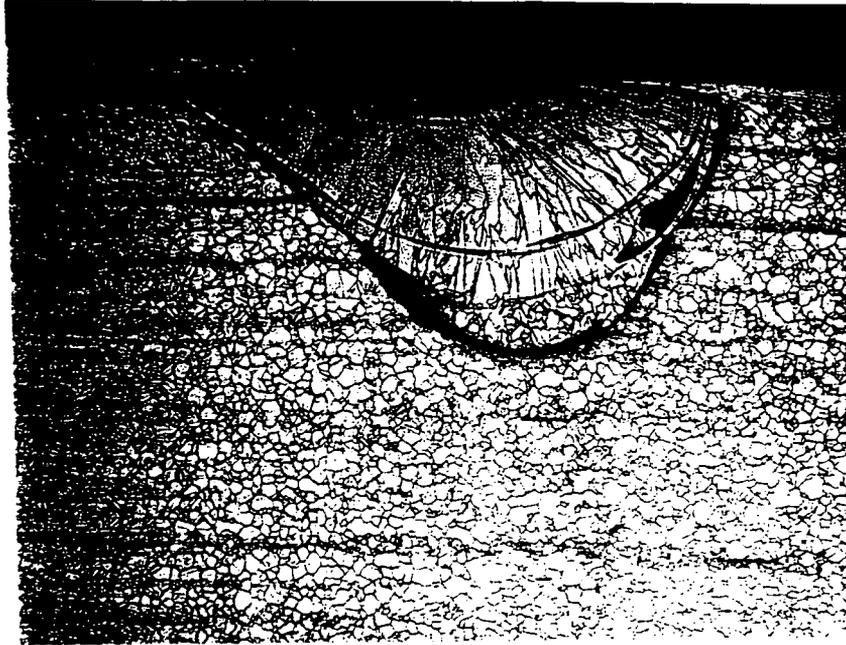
Cross section of weld KR 15 in the tube showing the deformation of the weld columnar structure. Mag. 100X
